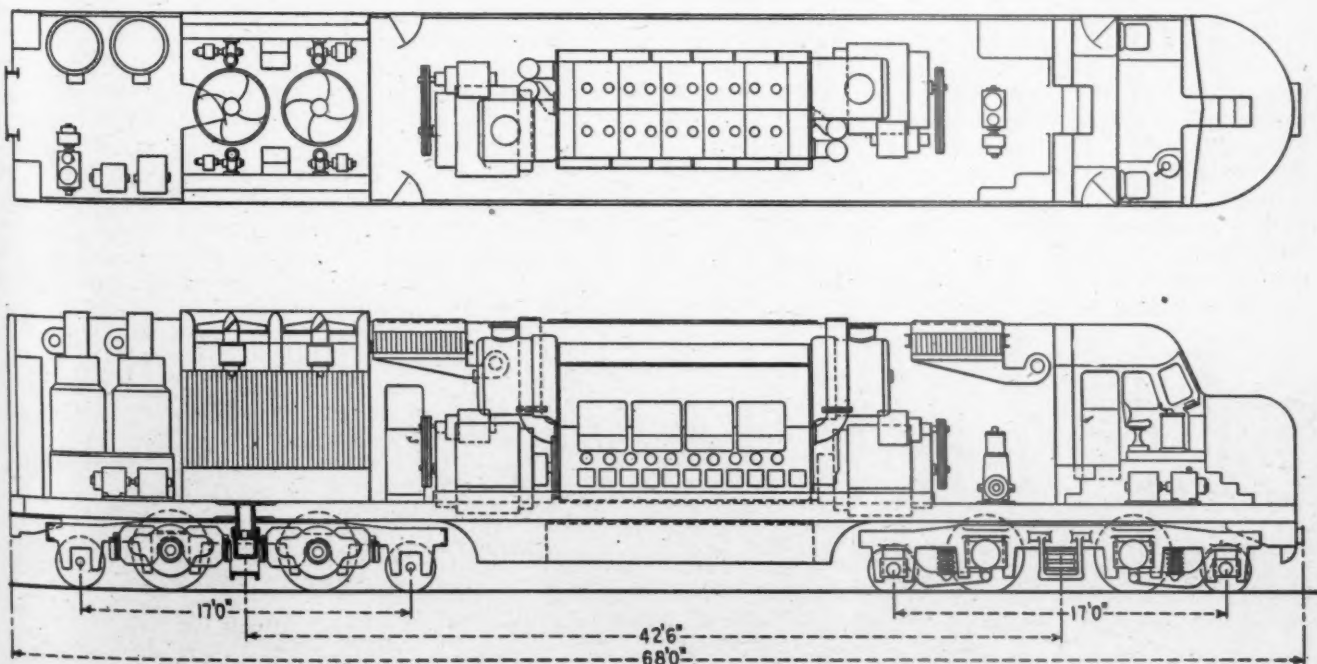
Proposed 3,000 Diesel-electric passenger locomotive with two adjacent junkers opposed piston-type 10-cylinder Diesels and twin-type traction motors
